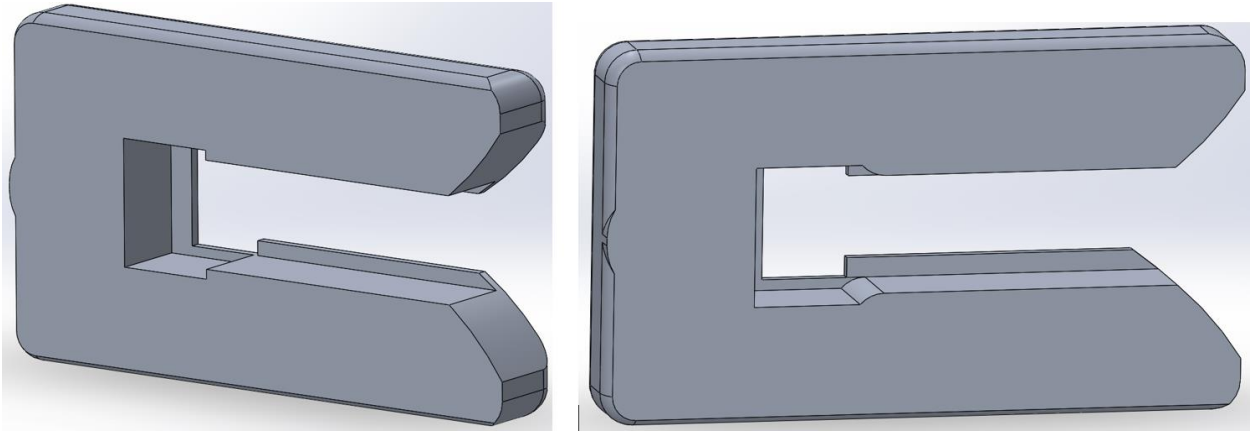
Opening Facing Outside (Left) and Opening Facing Inside (Right) Back View
